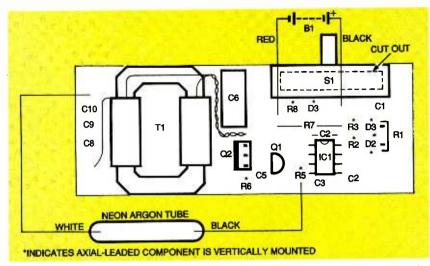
DRIVER CIRCUIT PARTS PLACEMENT DIAGRAM. The circuit can be built by point-to-pont wiring on 0.1-inch grid perforated board. Transformer T1 is a non-standard component.
